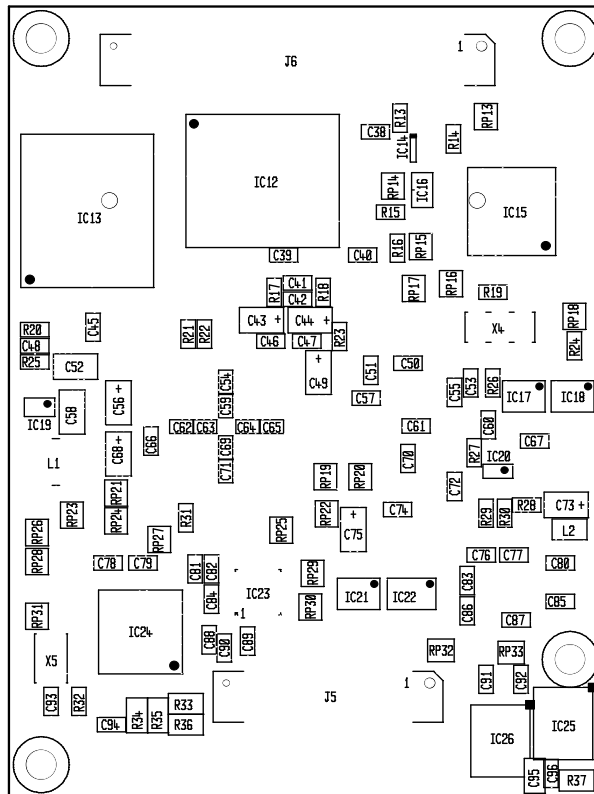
AA100 COMPONENT PLACEMENT – BOTTOM SIDE
